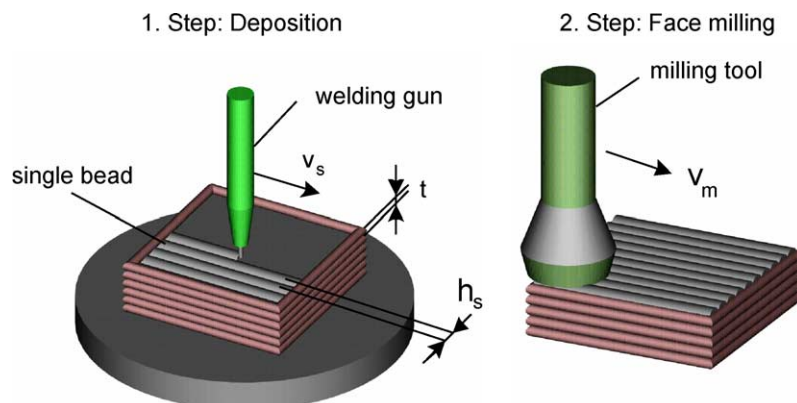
Process principle of 3D Welding and Milling.
